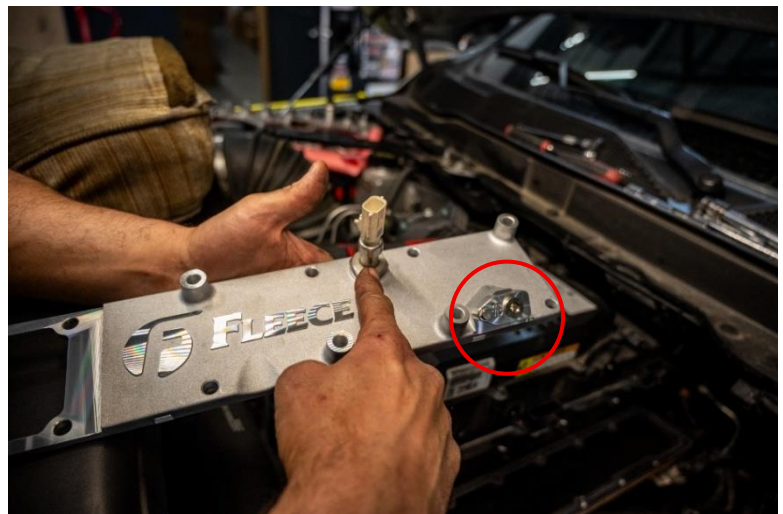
Intake temp sensor installed into new Fleece intake plenum. MAP sensor plug installed.
